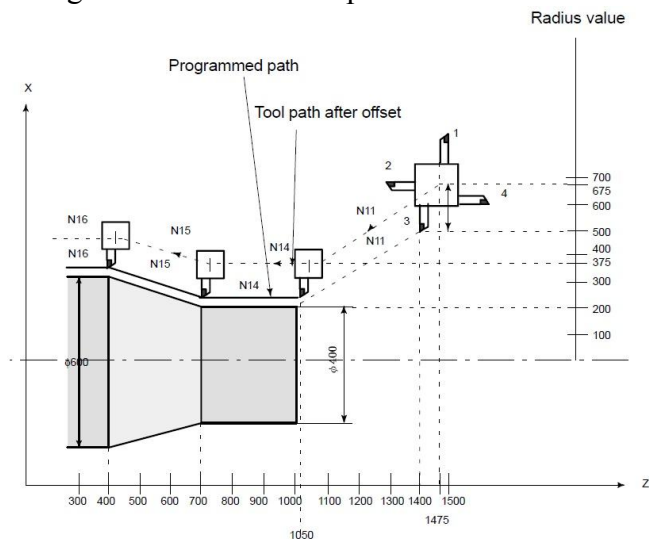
Example of the workpiece coordinate system for constant surface speed control
